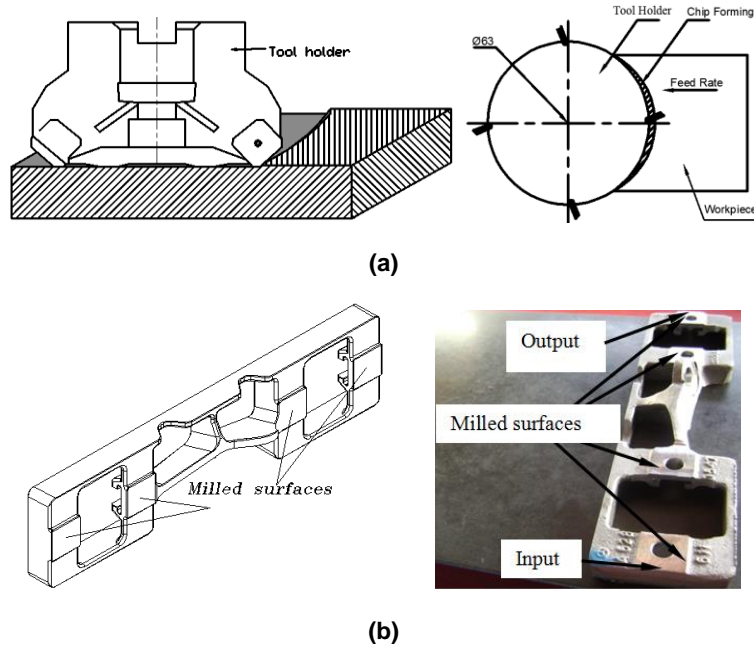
Milling operation of work piece: a) Symmetric milling, b) The milled surfaces
